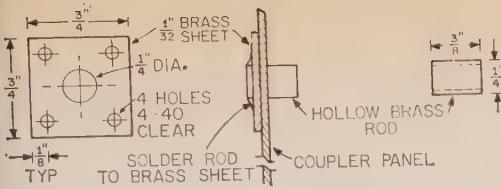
PLATE B—This plate and bushing are used to hold the Millen universal coupling which connects L₁ to the rotary turret.
